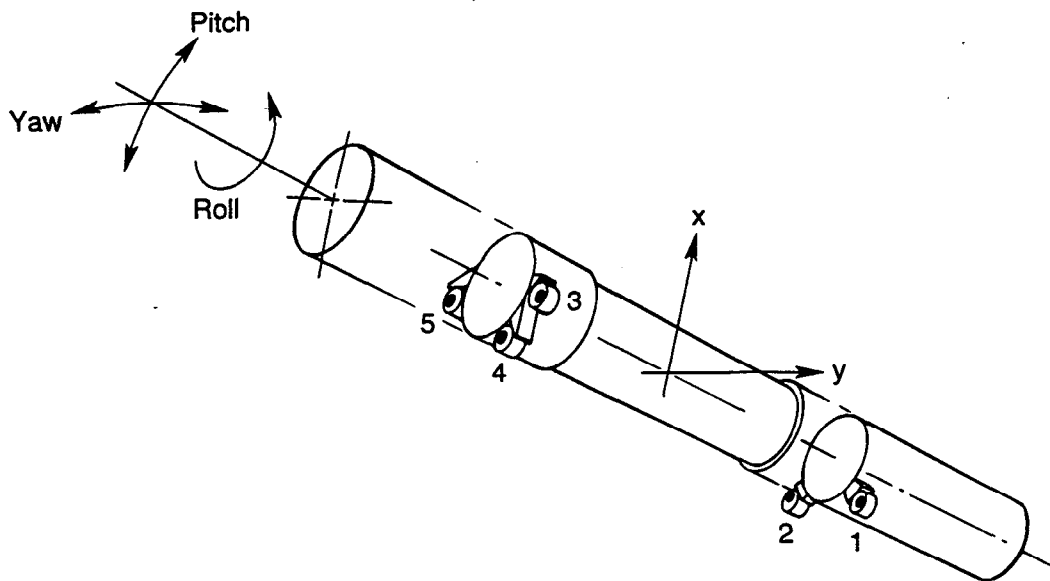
View of the support barrel, showing its five remotely adjusted roller cams.
